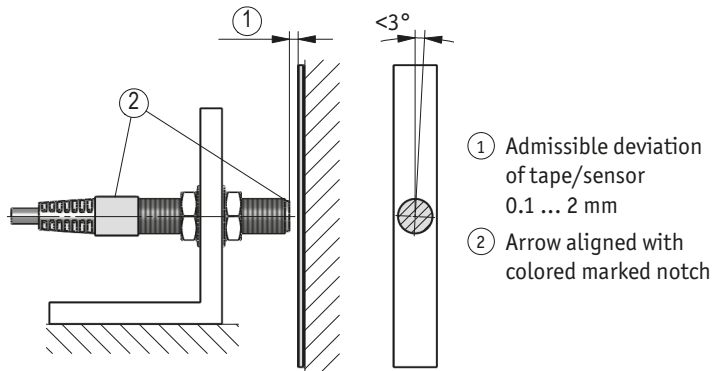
Assemblage sensor / magnetic tape, gap measure, tolerances
